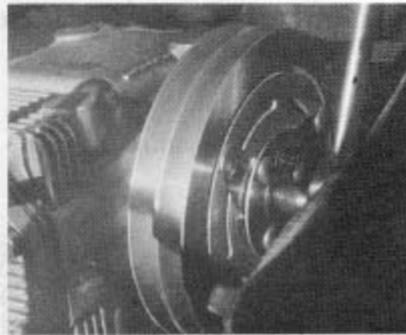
Use bolt to pull clutch assembly on threaded hubs.
